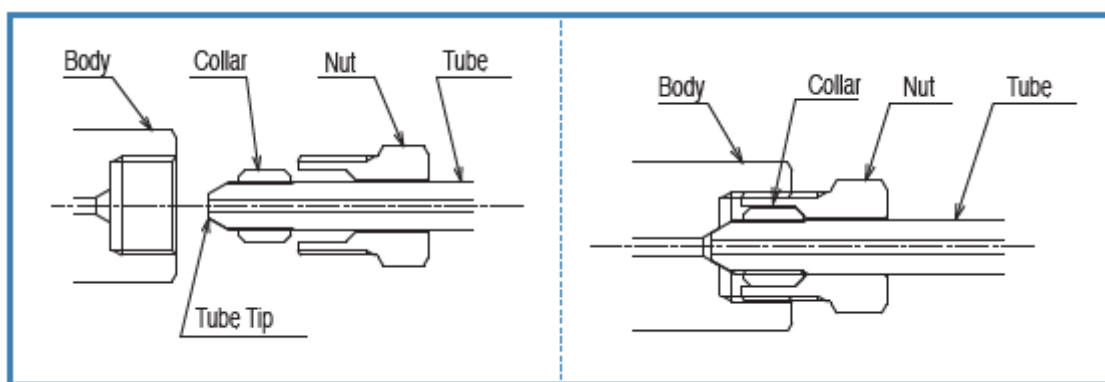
Structural drawing of a cone & thread type connection [21]
